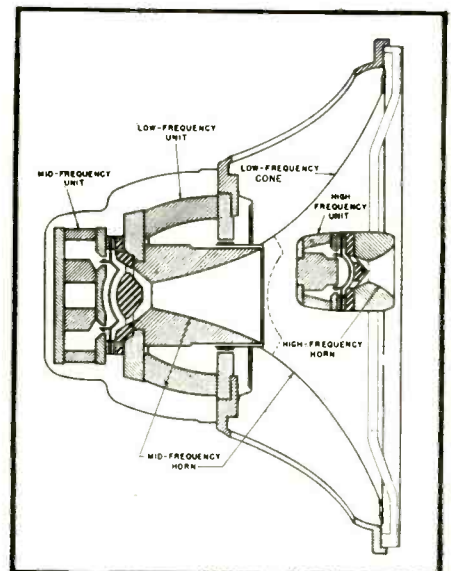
The cutaway drawing of the speaker of Fig. 19 makes the construction clearer. The midfrequency horn goes right through the center of the woofer voice-coil and magnet assembly and is driven by an entirely separate coil-magnet assembly mounted behind the large one.
